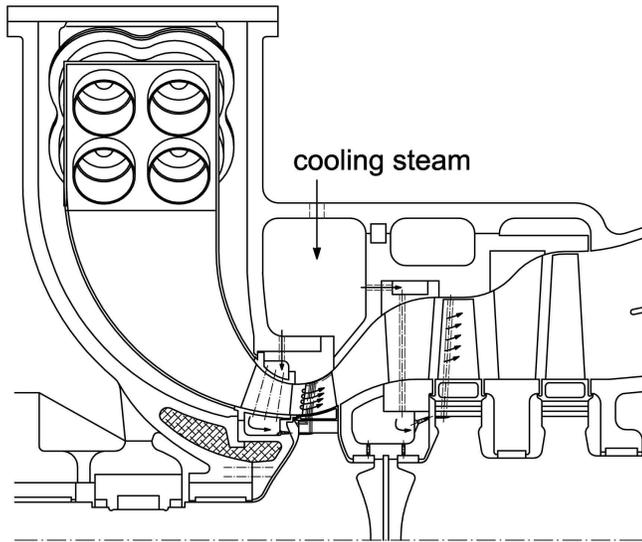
HTT cooling flow in both rotors and intermediate shaft vibration damper
